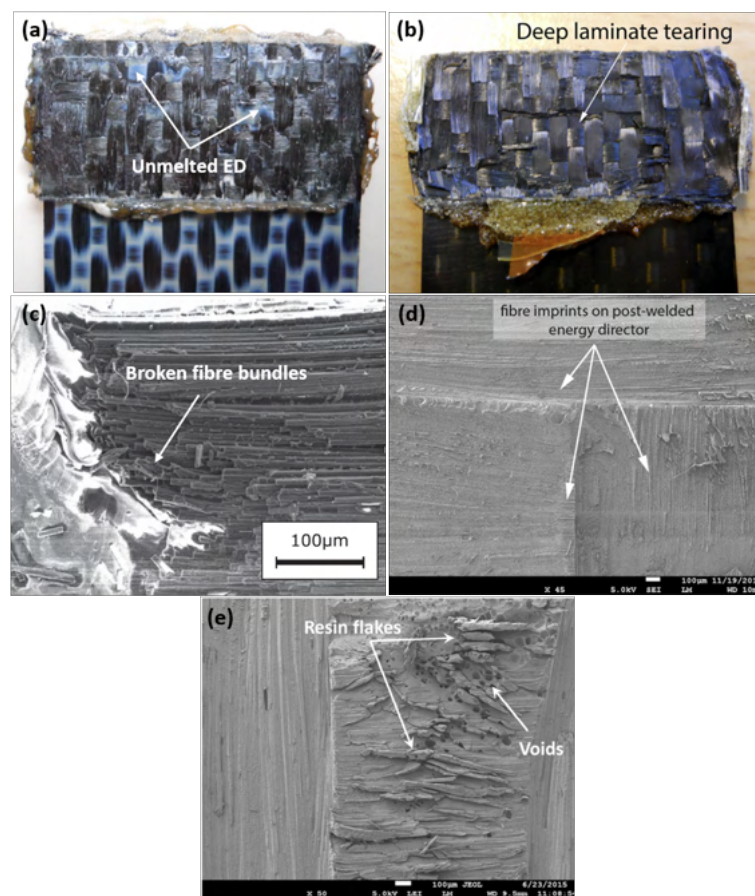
Interfacial fracture microographies of welded specimens with different fracture mechanisms: unmelted areas [Fernandez Villegas and Palardy, 2017] (a), composite tearing [Villegas, 2014] (b), broken fibers [Goto et al., 2019] (c), fiber imprints [Villegas, 2014] (d) and resin flakes and voids [Palardy and Fernandez Villegas, 2017] (e)
